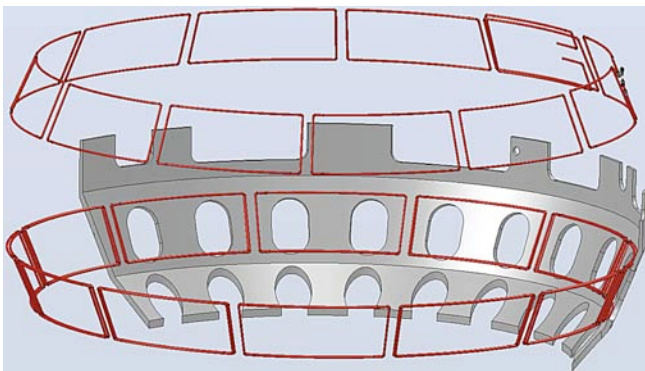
Proposed layout of 24 outer wall coils arranged in two rows of 12 coils above and below the midplane. The entire array will be protected by armor tiles.
